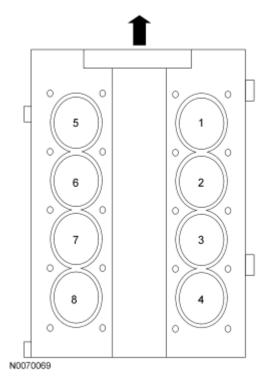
Engine Cylinder Identification Courtesy of FORD MOTOR CO.
